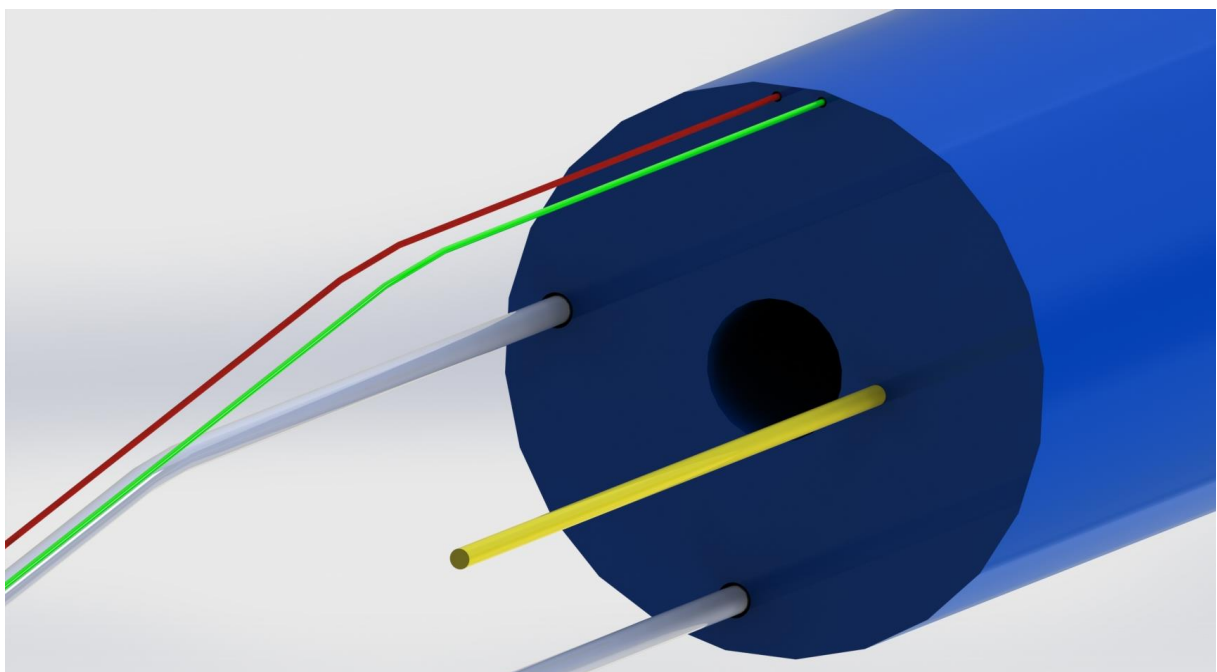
Cross-section view of the catheter, displaying the inner wires, strands and power cable.
